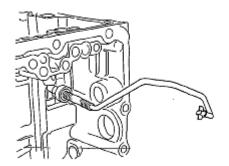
Identifying Parking Rod And Manual Valve Lever Courtesy of MAZDA MOTORS CORP.
